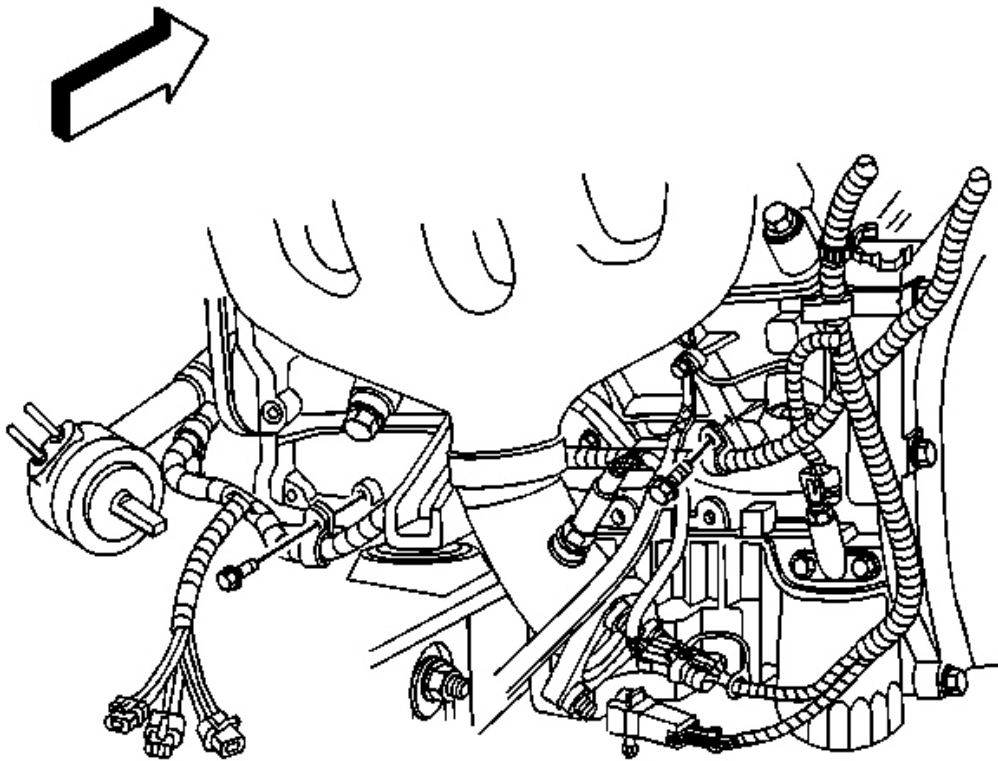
Transmission Wire Harness & Engine Wire Harness
